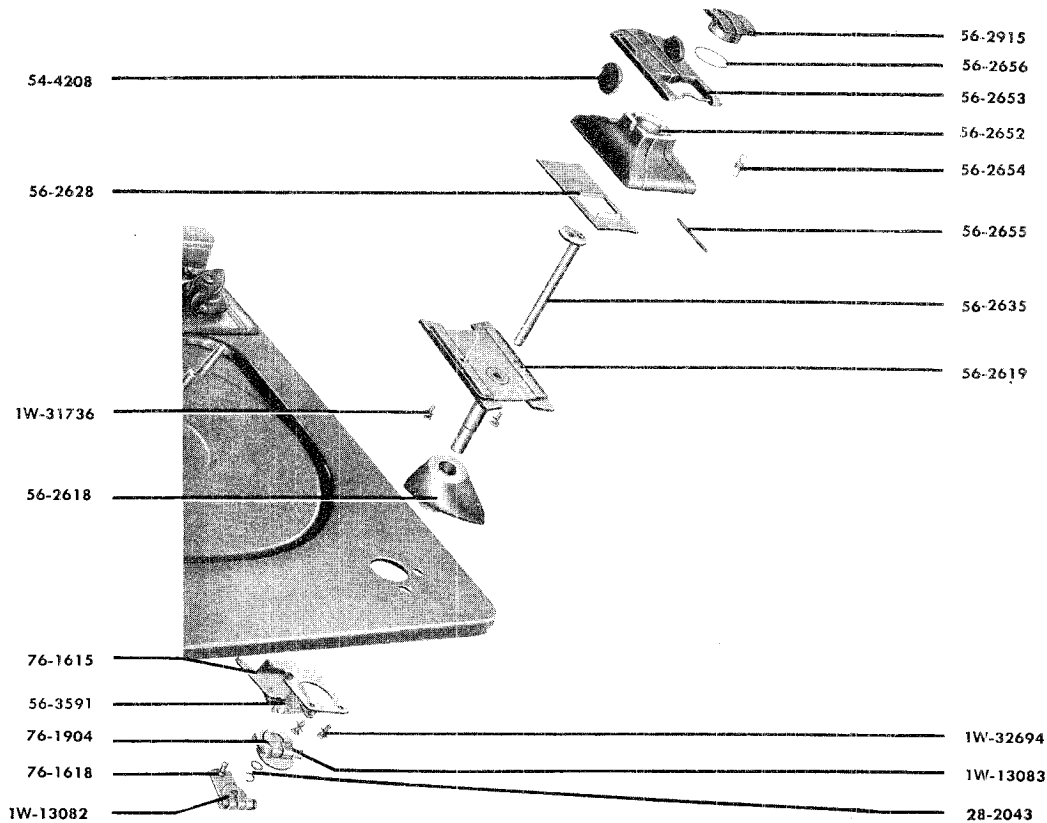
RECORD SHELF AND ASSOCIATED ASSEMBLIES, EXPLODED VIEW.
